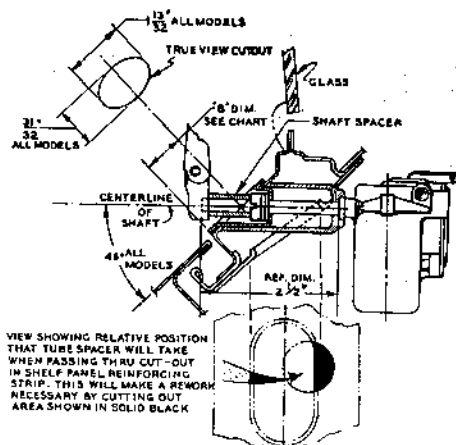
Cross Section View Showing Location of Rear Window Wiper Motor
